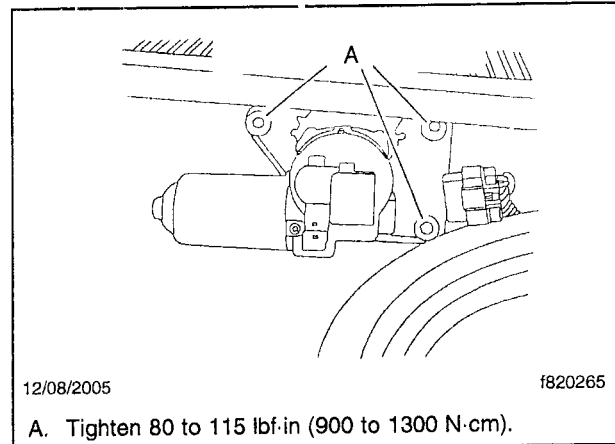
, Tightening Windshield-Wiper Motor Bolts
